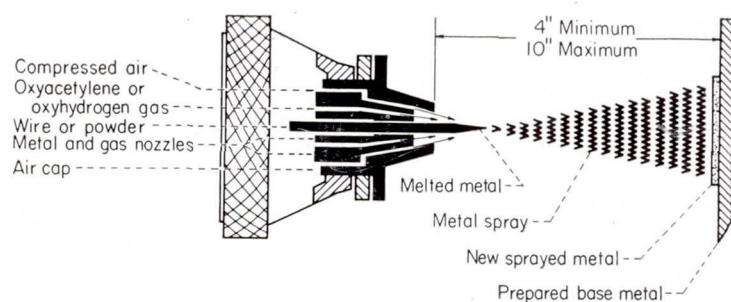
Schematic drawing showing action of wire-type metal spray gun (from ref. 16).
